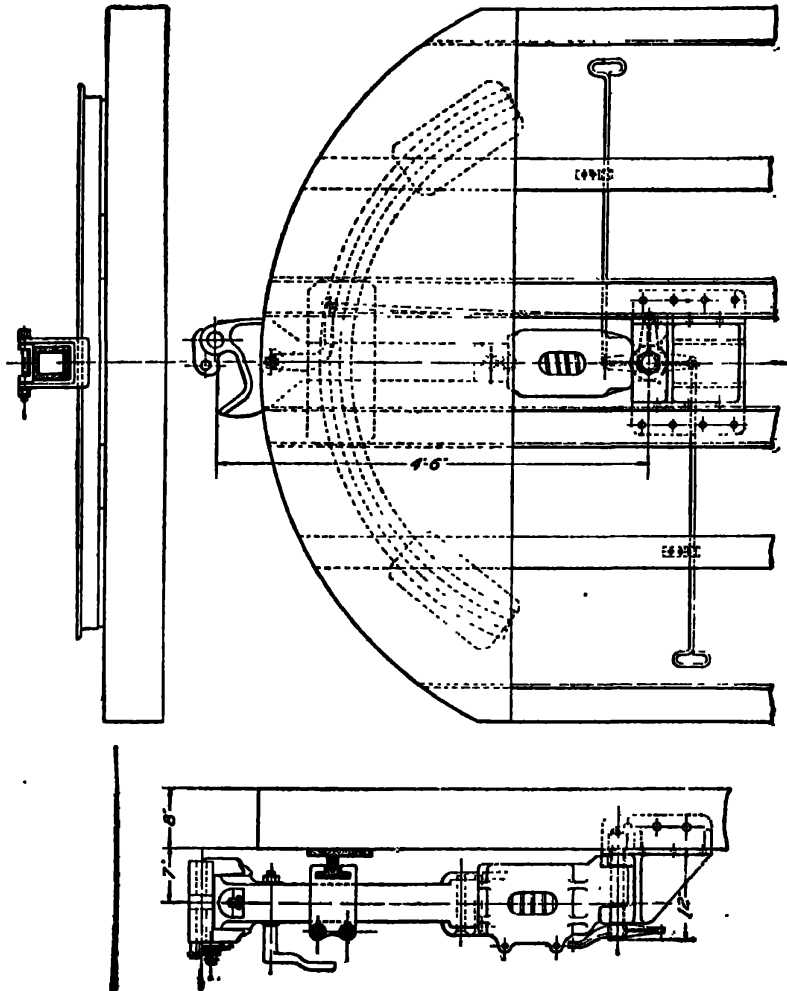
Plan and Elevation of Standard M.C.B. Coupler
